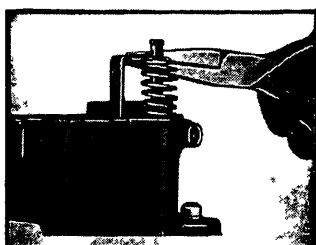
Remove entire pump. Disconnect pump operating link and spring from plunger. Examine leather for wear or indication of leakage
